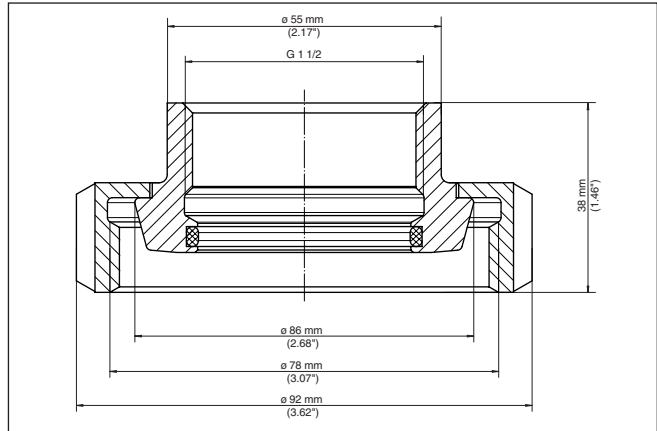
Dimensions of threaded adapter G1½ (DIN 3852-X) on slotted nut DN 50 (DIN 11851) PN 16
